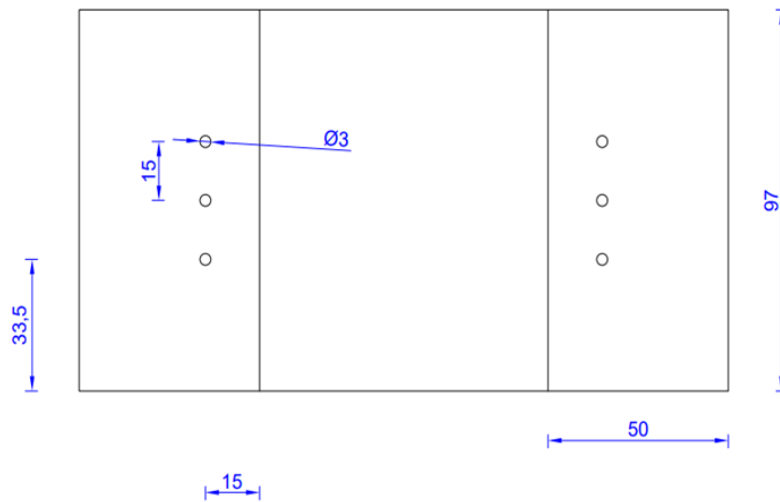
location and dimensions of thermocouples holes in the duct (mm)
